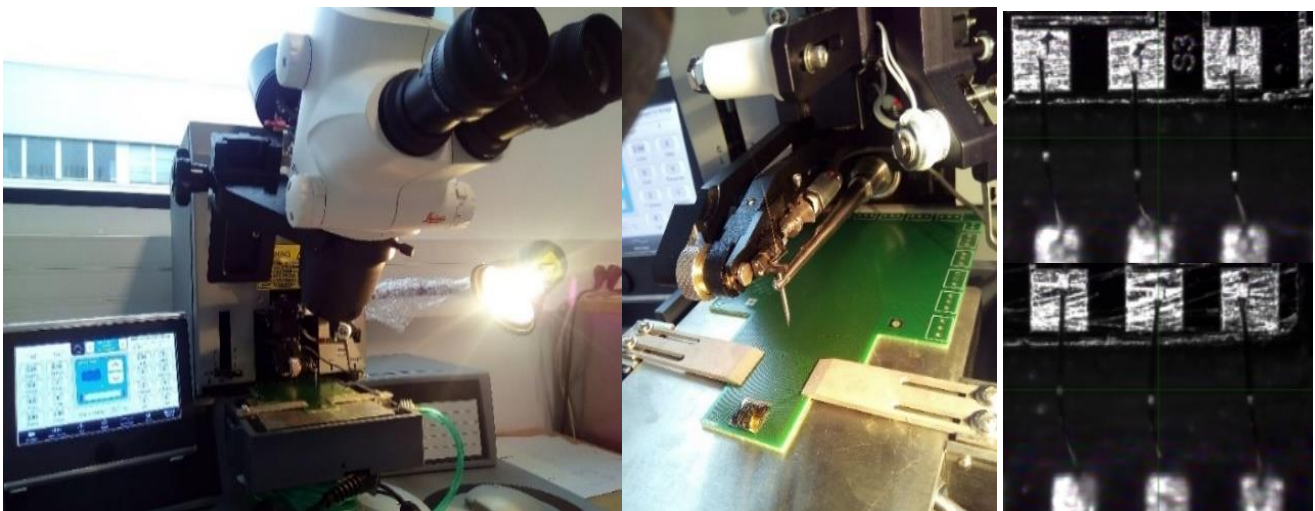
Wire bonding machine and the connection between the chips and the PCB.
